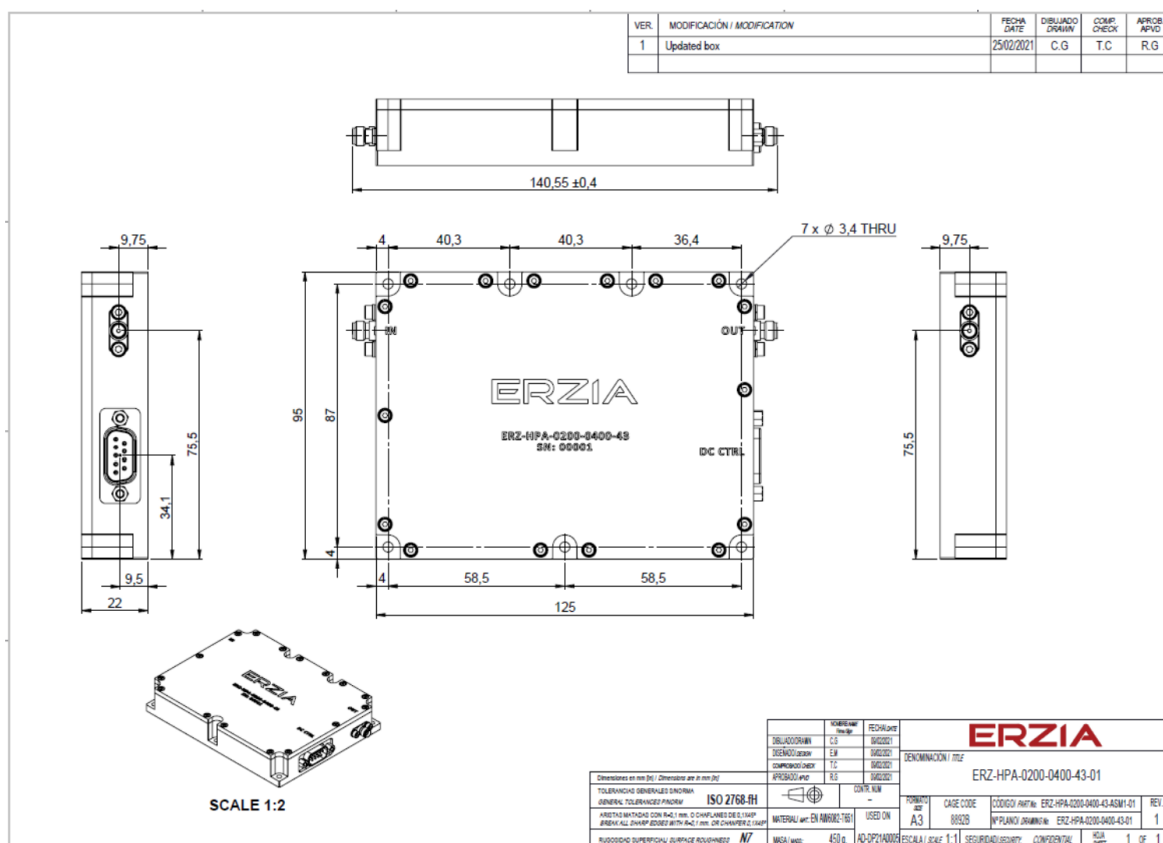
ERZ-HPA-0200-0400-43 Outline Drawing
